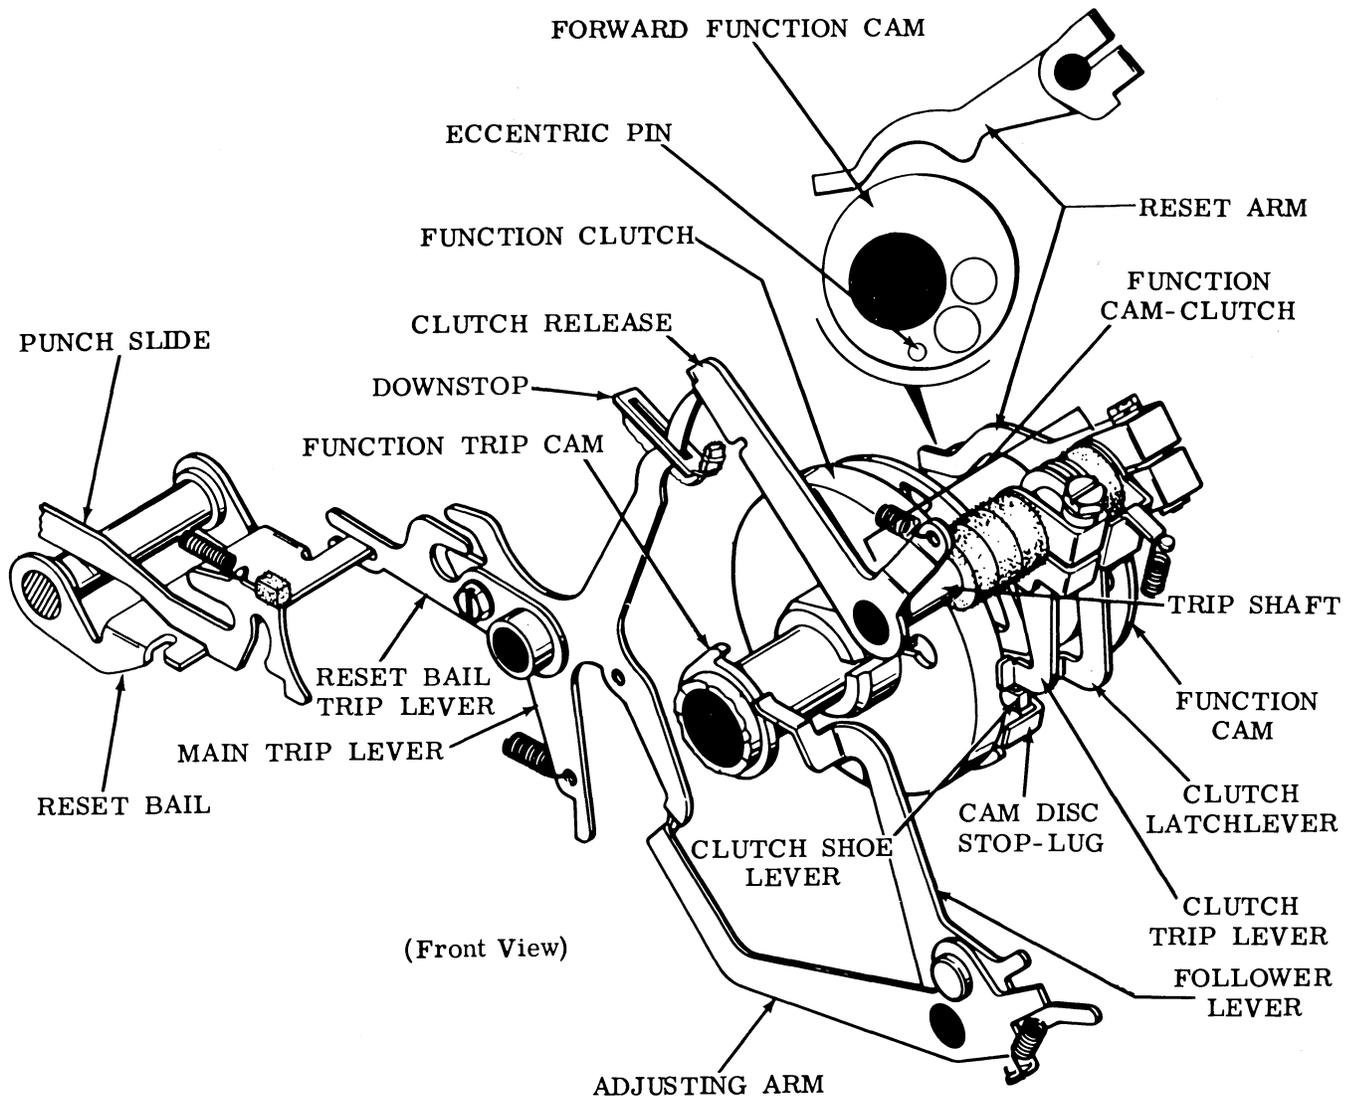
Function Cam-Clutch and Clutch Trip Assembly
